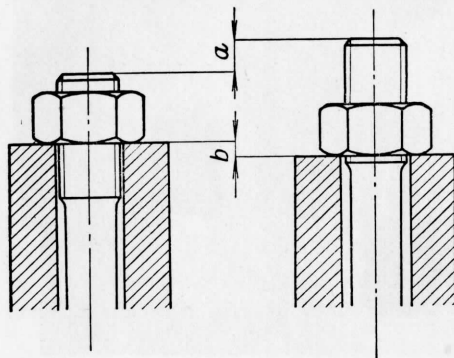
By screwing up the nut the bolt is expanded by a , and the washer compressed by b .
